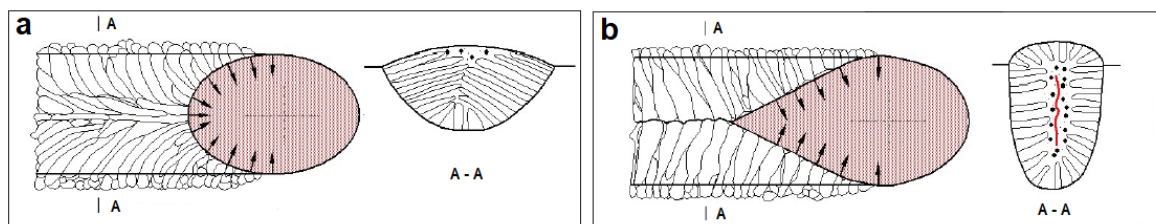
The influence of welding speed on weld melt pool shape and solidification microstructure. a) Low welding speed – elliptical shaped melt pool. b) High welding speed – tear-drop shaped melt pool [73].
